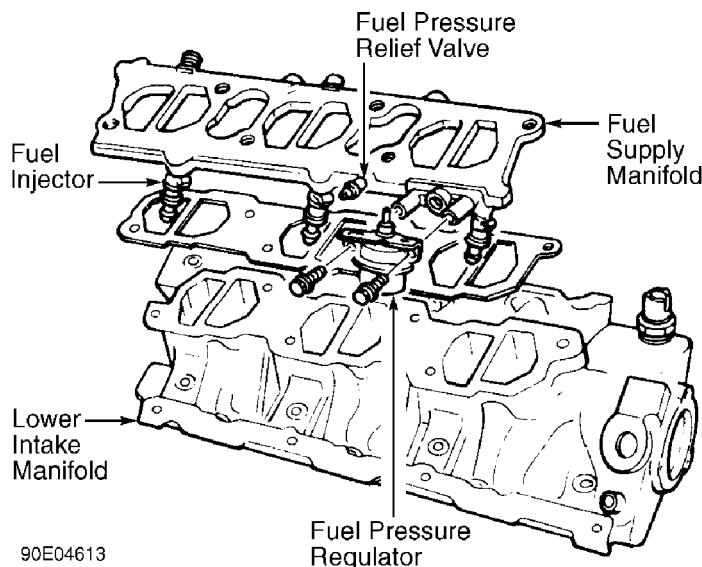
Exploded View Of Fuel Supply Manifold Assembly (Navajo)
